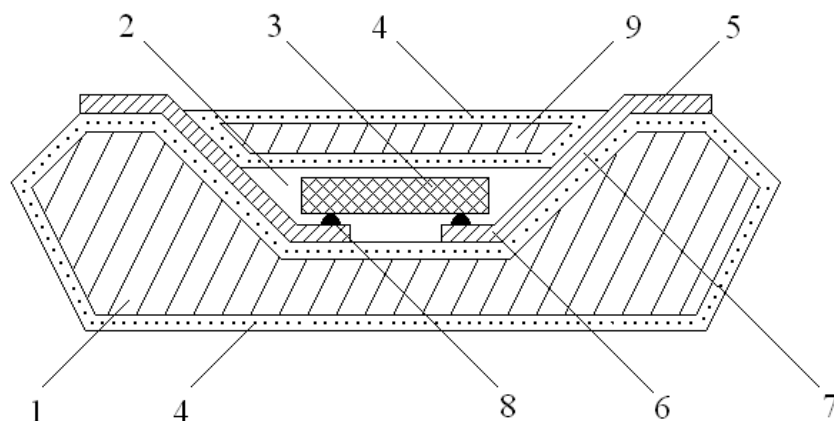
Leadless chip-carrier package: (1) aluminum base; (2) recess for the chip; (3) chip; (4) porous alumina; (5) external contact pads; (6) internal contact pads; (7) conducting bridges; (8) ball-bearing leads; (9) aluminum cap
